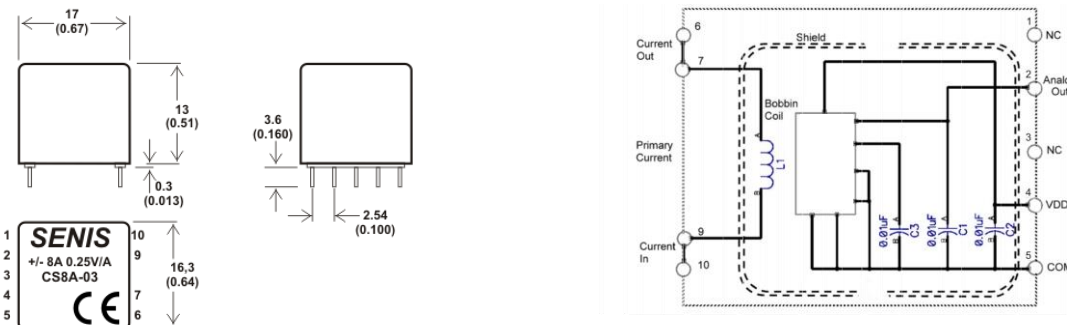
The CS-03 series sensor outline drawing (mechanical dimensions) and pin out description.
